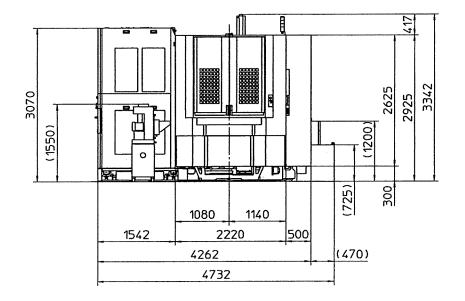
Front and Side View of Machine (Tool Magazine A97A/A137 and Left Discharge Lift-Up Conveyor Spec.) Ć
